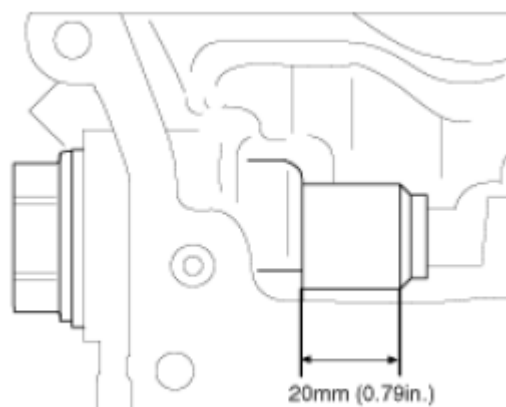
Identifying Distance Between Cylinder Head Surface And End Of Tensioner Plunger
